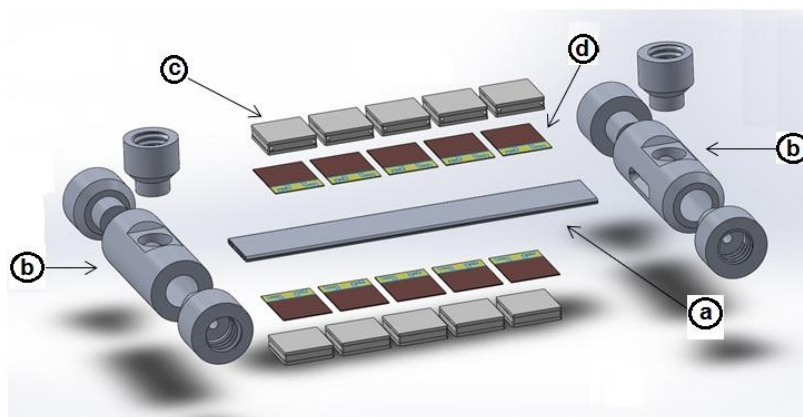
Exploded view of the test section containing the copper plates and the heat flow sensors.
